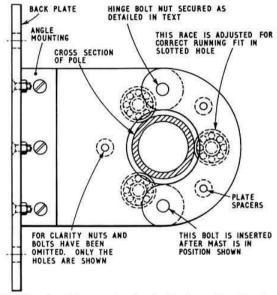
Top view of the upper bracket showing the position of bearings and plate spacers.
